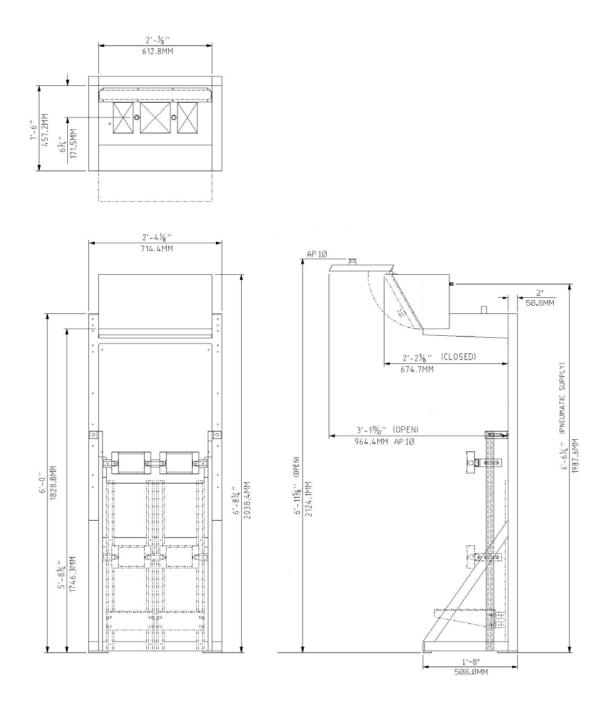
Outline Dimensions 2 Cylinder Cabinet
